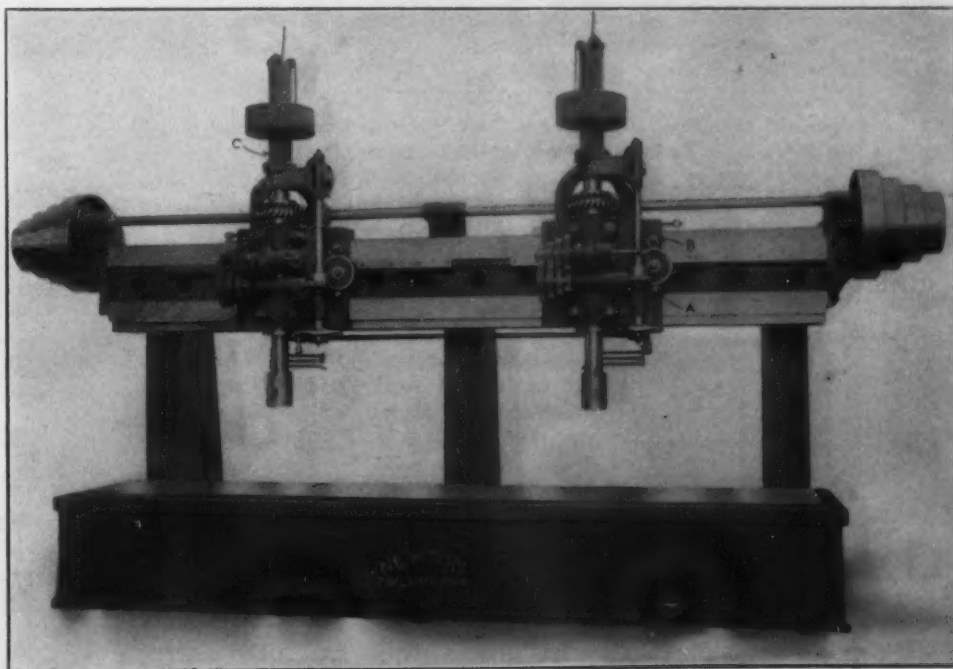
A Partly Assembled Machine, Showing the Heads Without Their Gear Covers.
